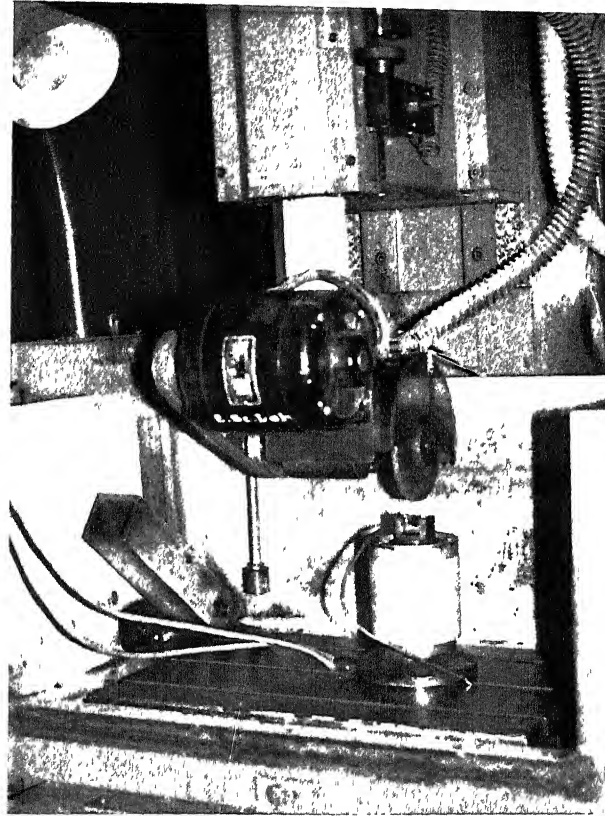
Photograph depicting the grinding attachment mounted on the ram of the EDM machine
